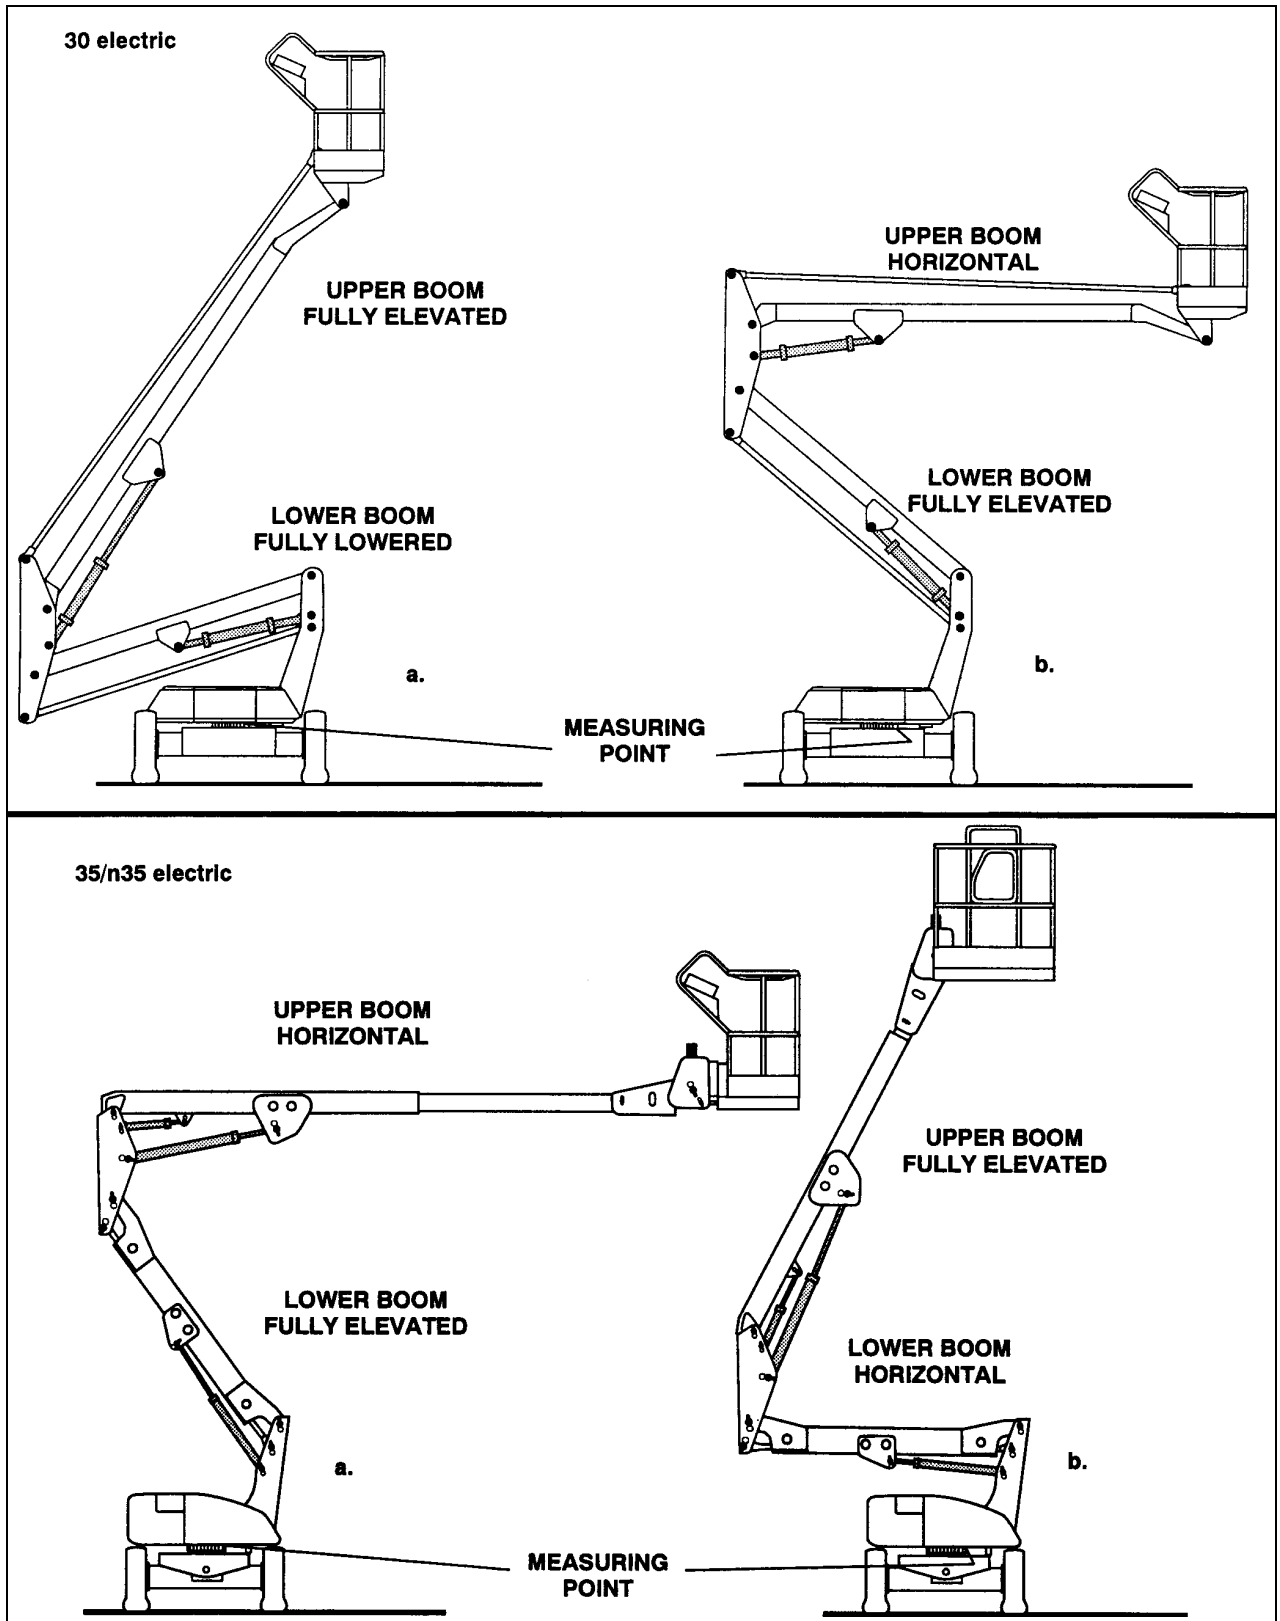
Swing Bearing Tolerance Boom Placement - 30/n30/n35 electric. (Sheet 1 of 2)
